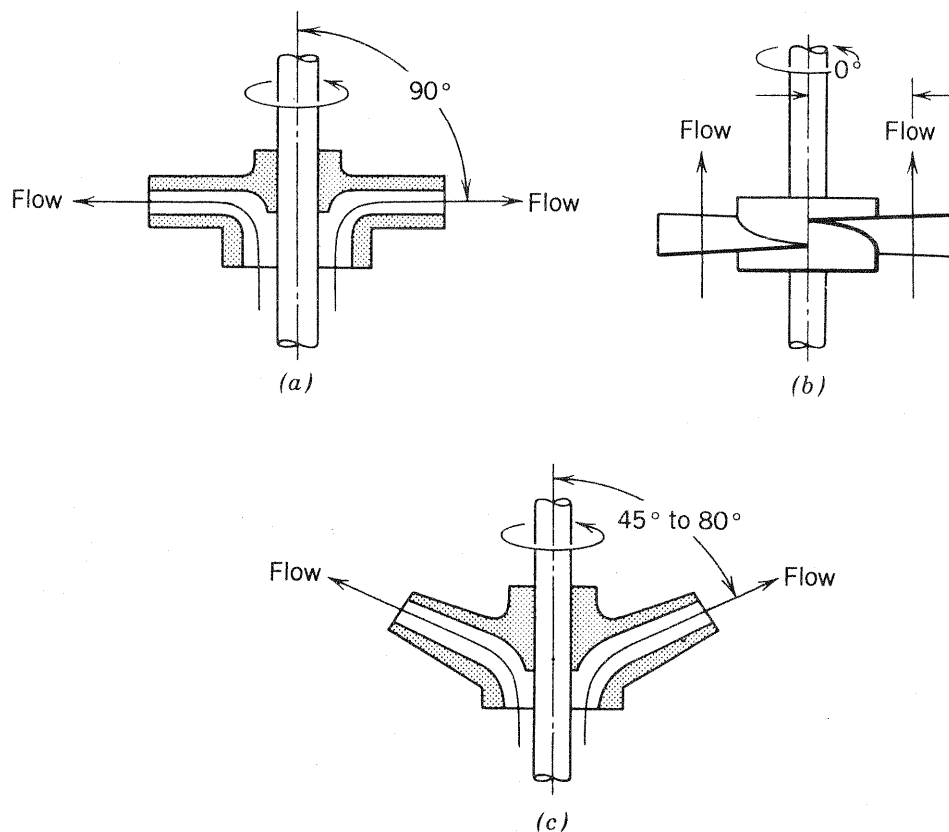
Impellers for centrifugal pumps. (a) Radial flow impeller. (b) Axial flow impeller. (c) Mixed flow impeller.
